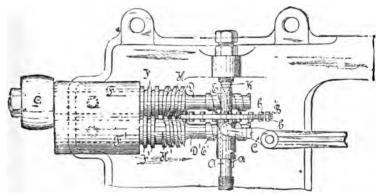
Positive Driving Mechanism. Goolden's Governor (Front View).
